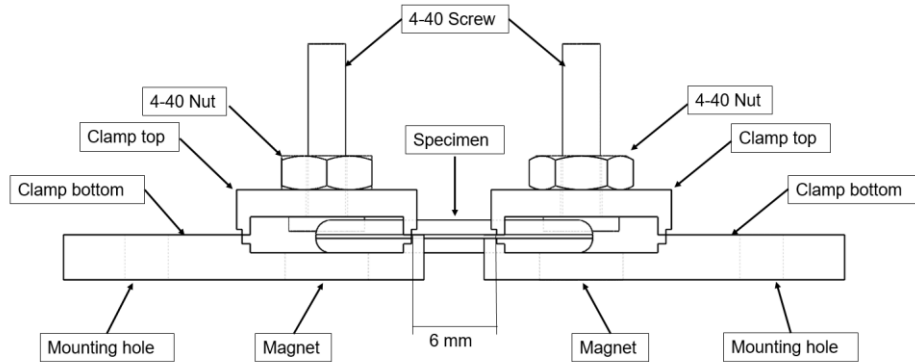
Adjustable magnetic clamps used to hold the specimen.
